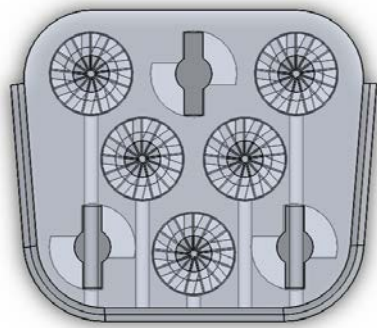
Gen 2 Gauntlet Tensioning Mechanism; Top View
